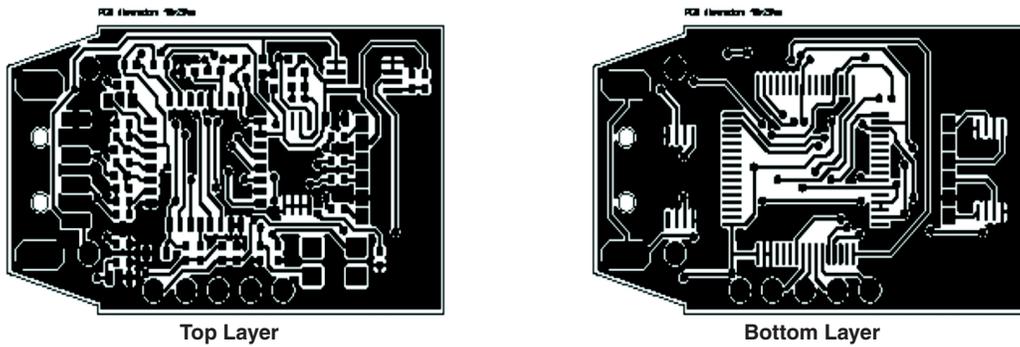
eZ430-RF USB Debugging Interface, PCB Layout
